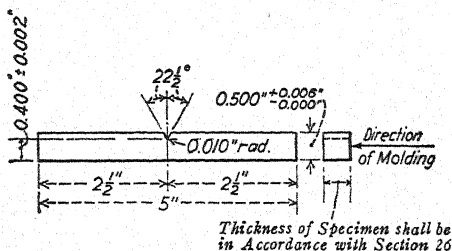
Simple Beam (Charpy) Impact Test Specimen.
